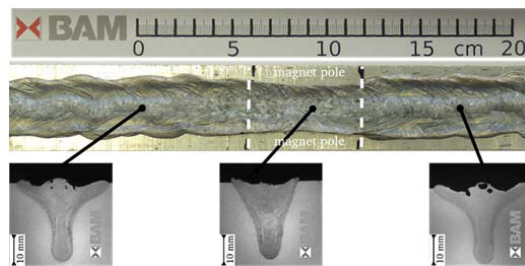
Experimental results for the welding of AlMg3 with a welding speed of 0.5 m/min without (left and right) and with permanent magnets (500 mT) applied (center). Welds were made with a disk laser (16 kW, focus position -4 mm, 300 μ m focal spot diameter, magnetic flux density 0.5 T).
